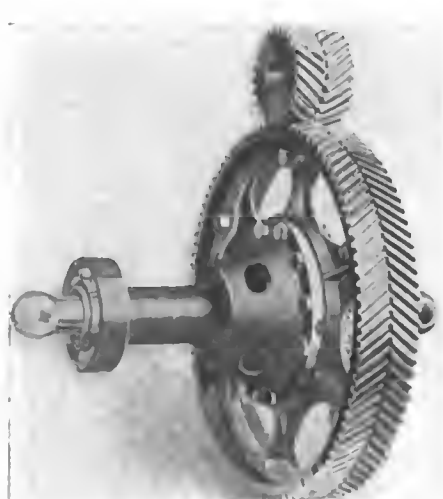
Herringbone toothed pinion and gear, with the latter flanged to differential gear housing
